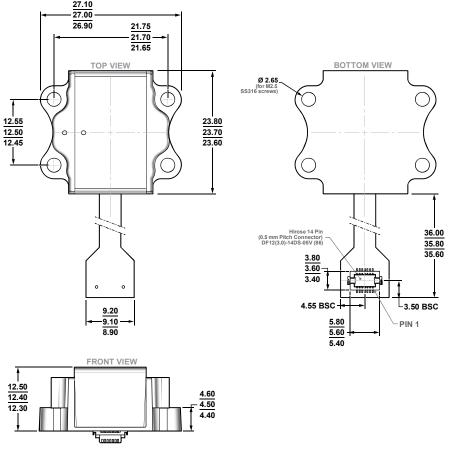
14-Lead Module with Integrated Flex Connector [MODULE] (ML-14-7) Dimensions shown in millimeters
